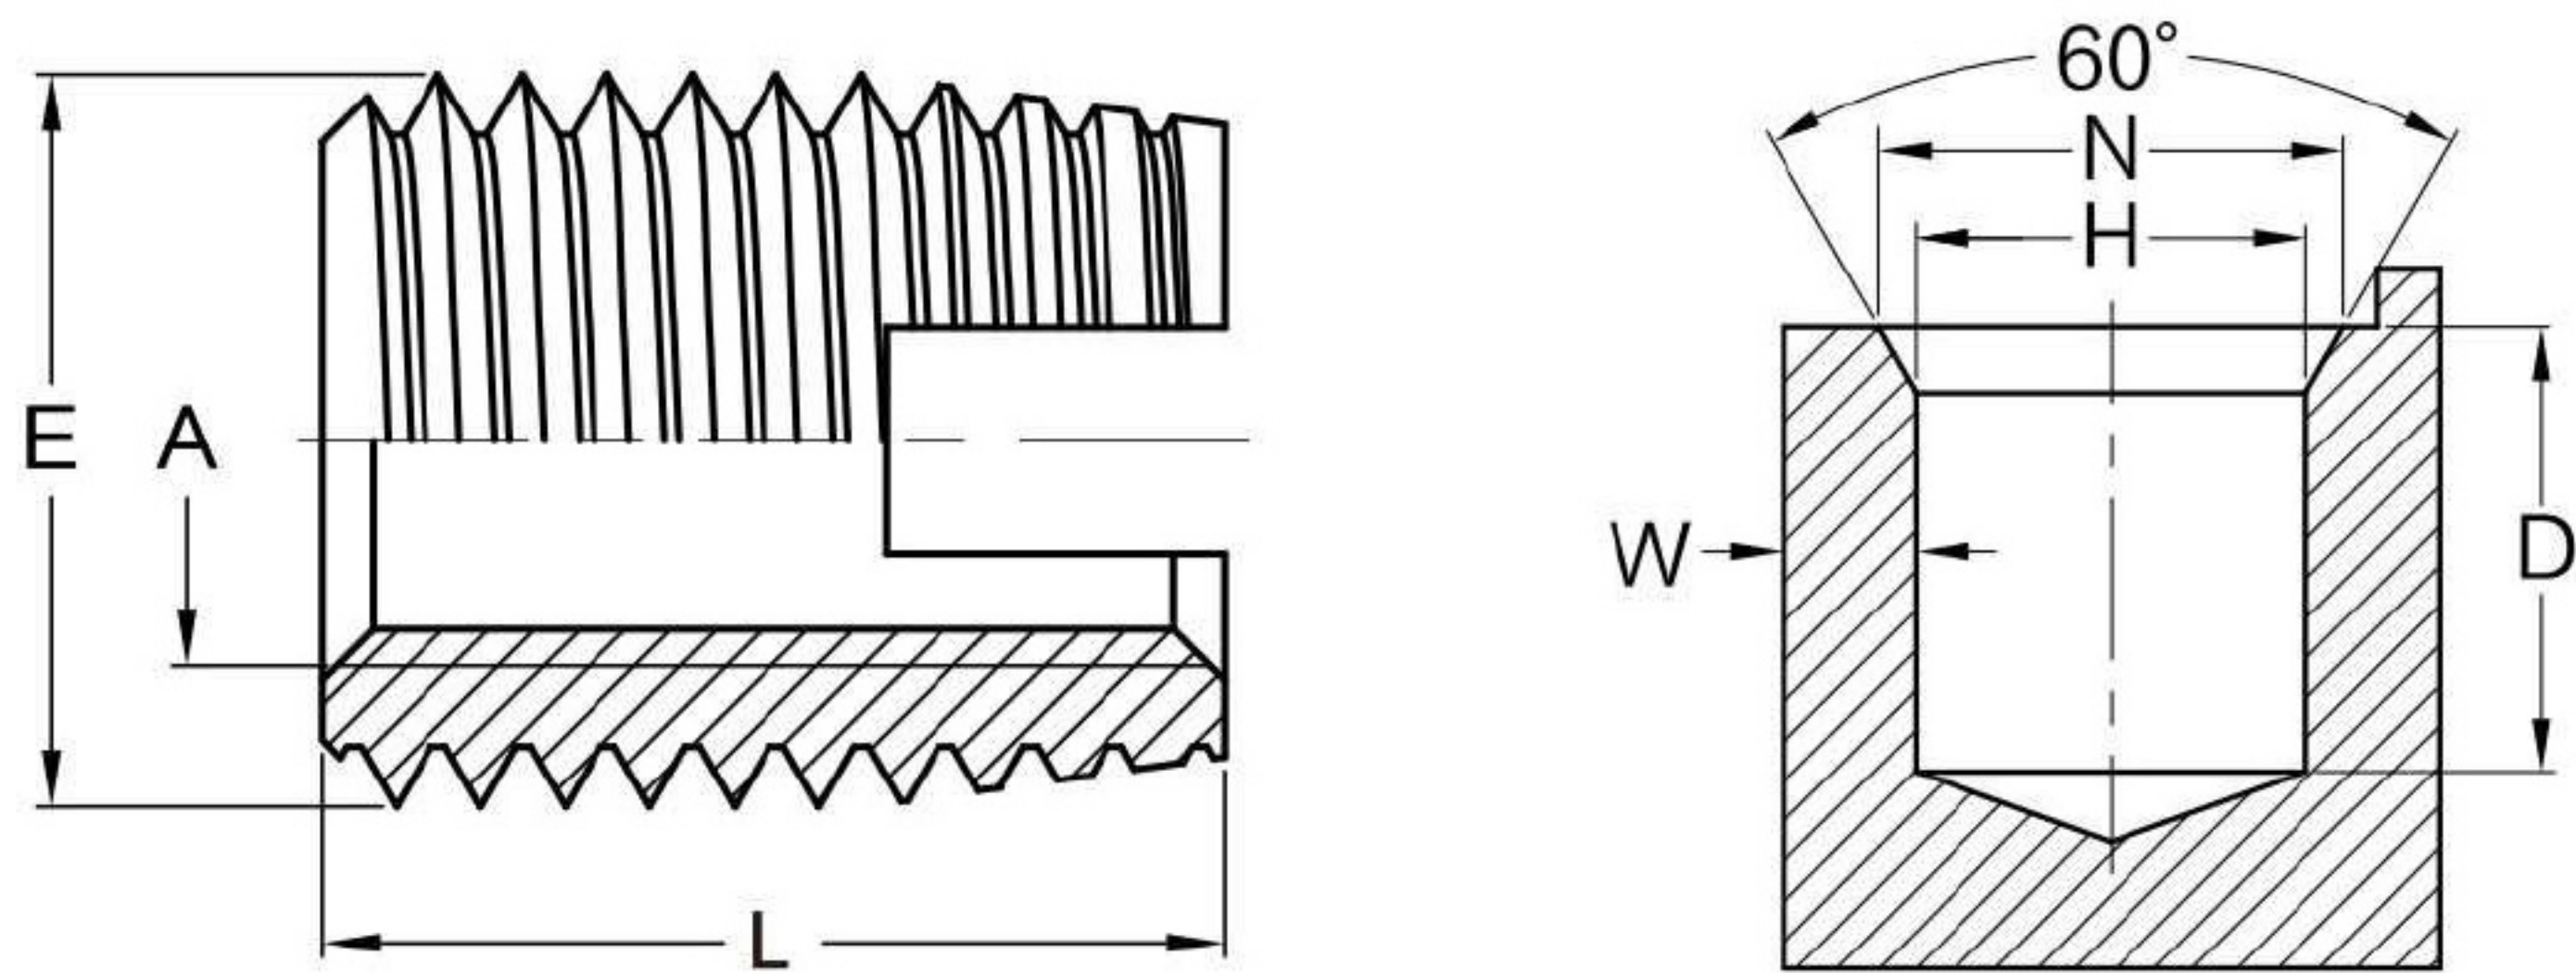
A Internal thread	E External thread	P Pitch	L Length	SW ^{+0.1} ₀ Hexagonal socket ...2...	D Minimum borehole depth for blind holes
